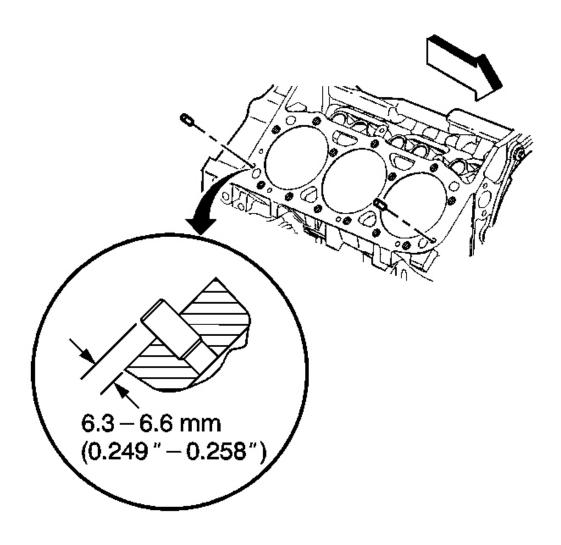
Cylinder Head Dowel Pin Measurement Courtesy of GENERAL MOTORS CORP.
